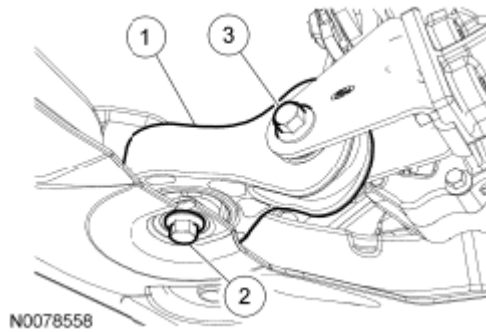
Identifying Transaxle Roll Restrictor With Short And Long Bolt
